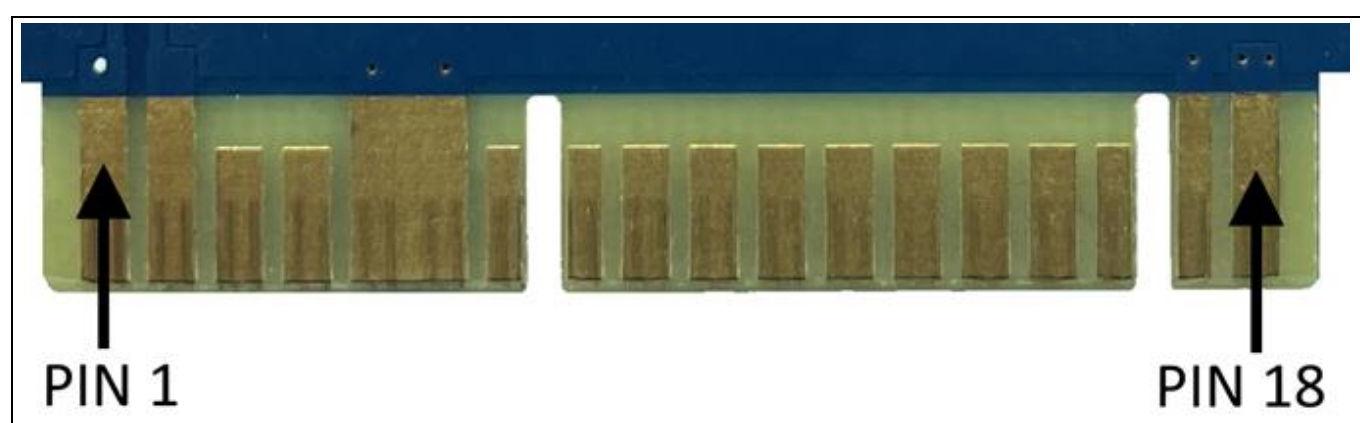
Edge card header with 36 pins (18 pins symmetrical, top and bottom); designed to work with EBC18DCWN-S371 board-to-board receptacle connector
